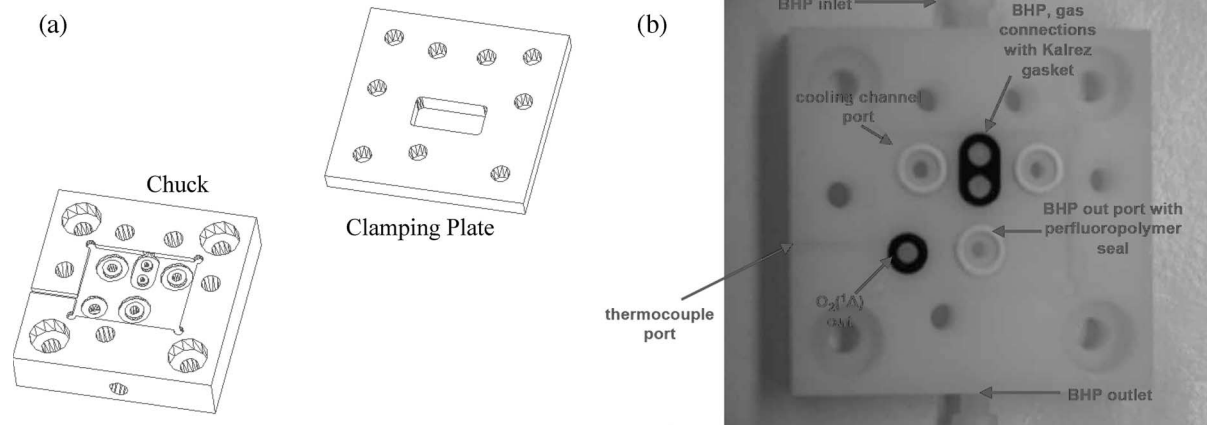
(a) Three-dimensional drawing of the improved μ SOG package. (b) Photograph of the package chuck with the o-ring and gaskets installed.
